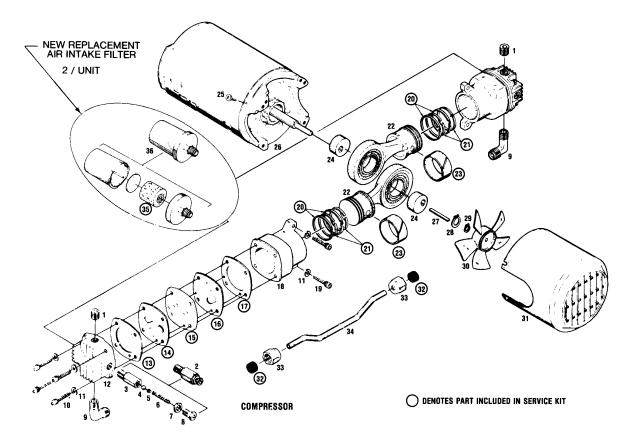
EXPLODED VIEW OF COMPRESSOR AND MOTOR ASSEMBLY
